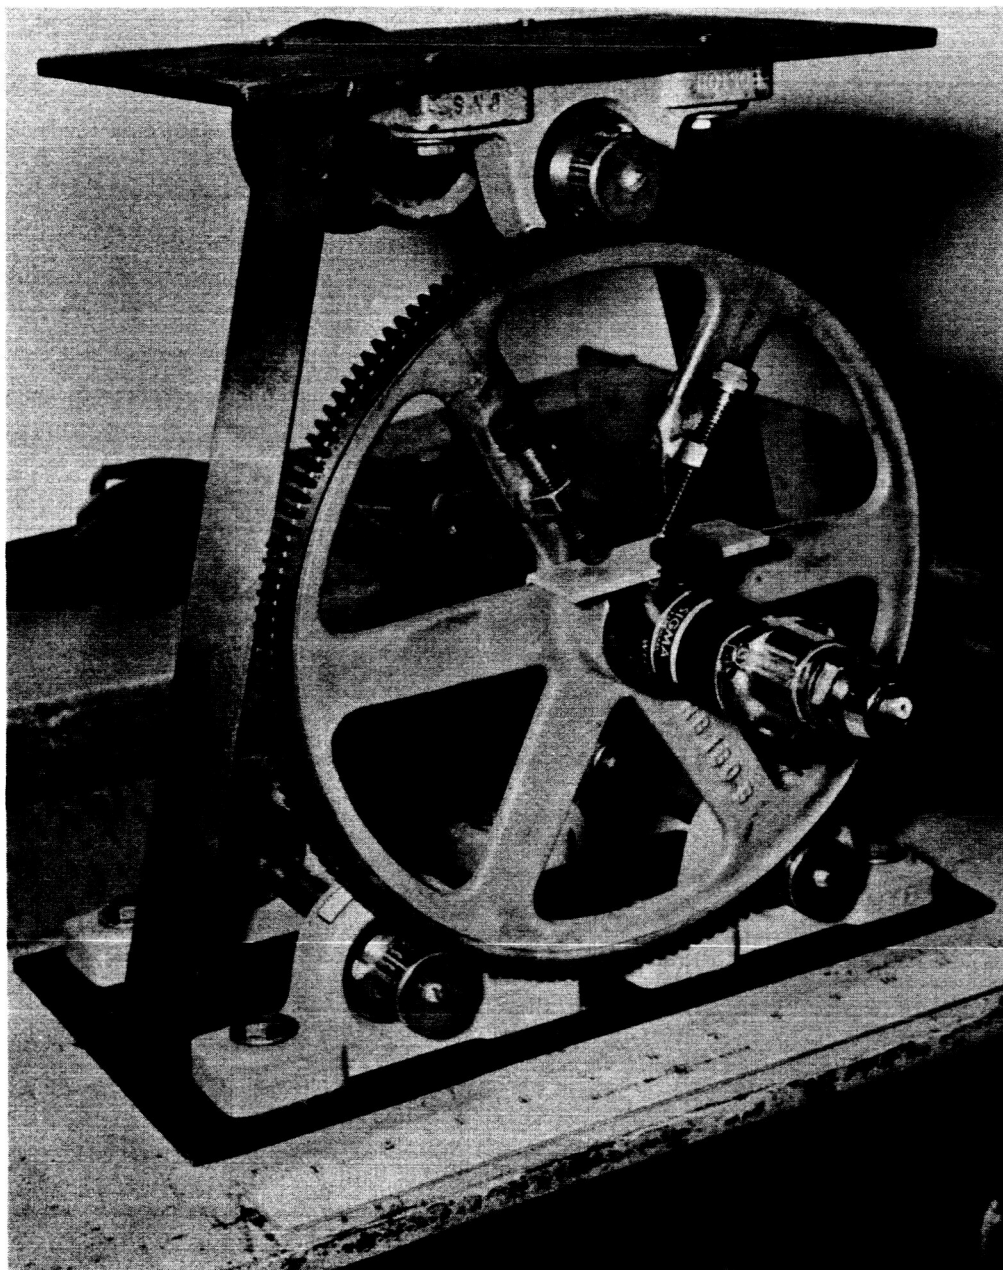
HINGED CONTACT TUBE FOR MECHANIZING
